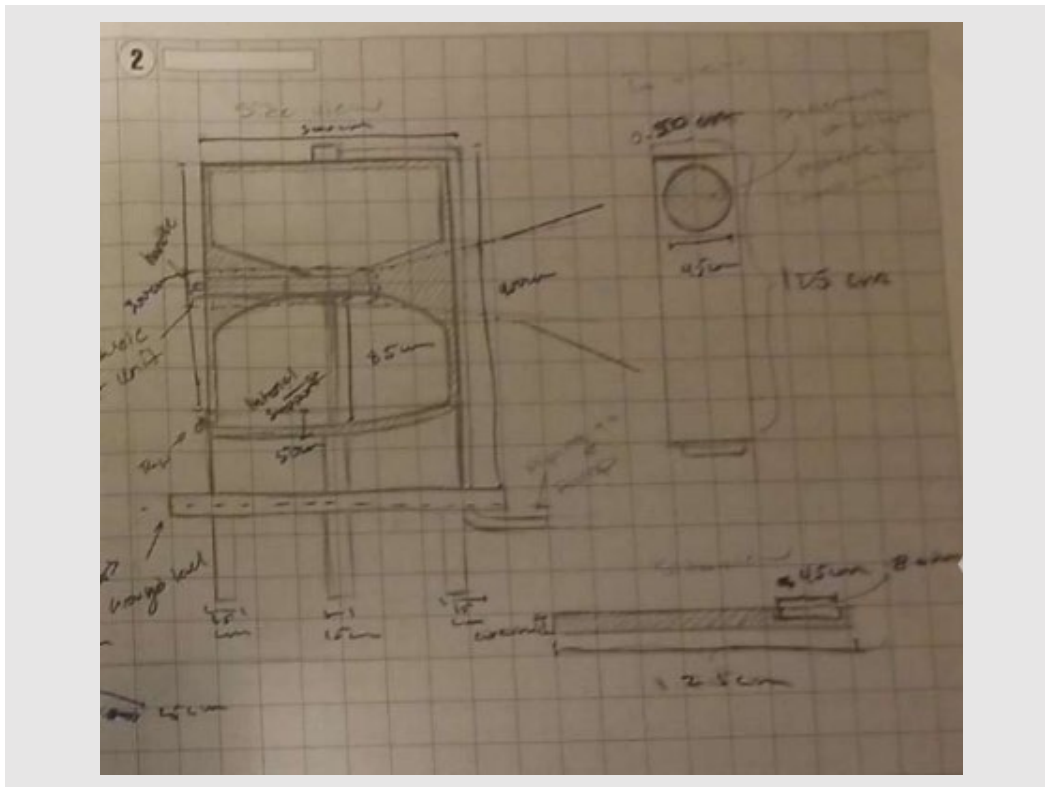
Dimensioned and labeled technical drawing of the CDC's removable water filter.
